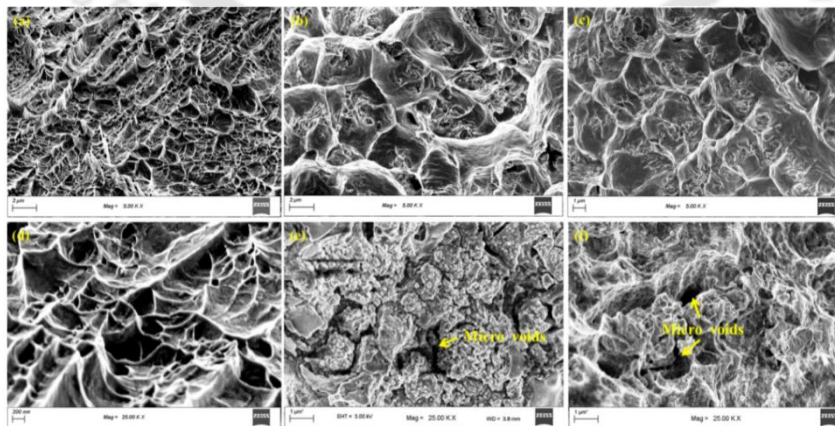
Tensile fracture surfaces in lower and higher magnification (a, d) base material, (b, e) CC welded sample and (c, f) PC1 welded sample
